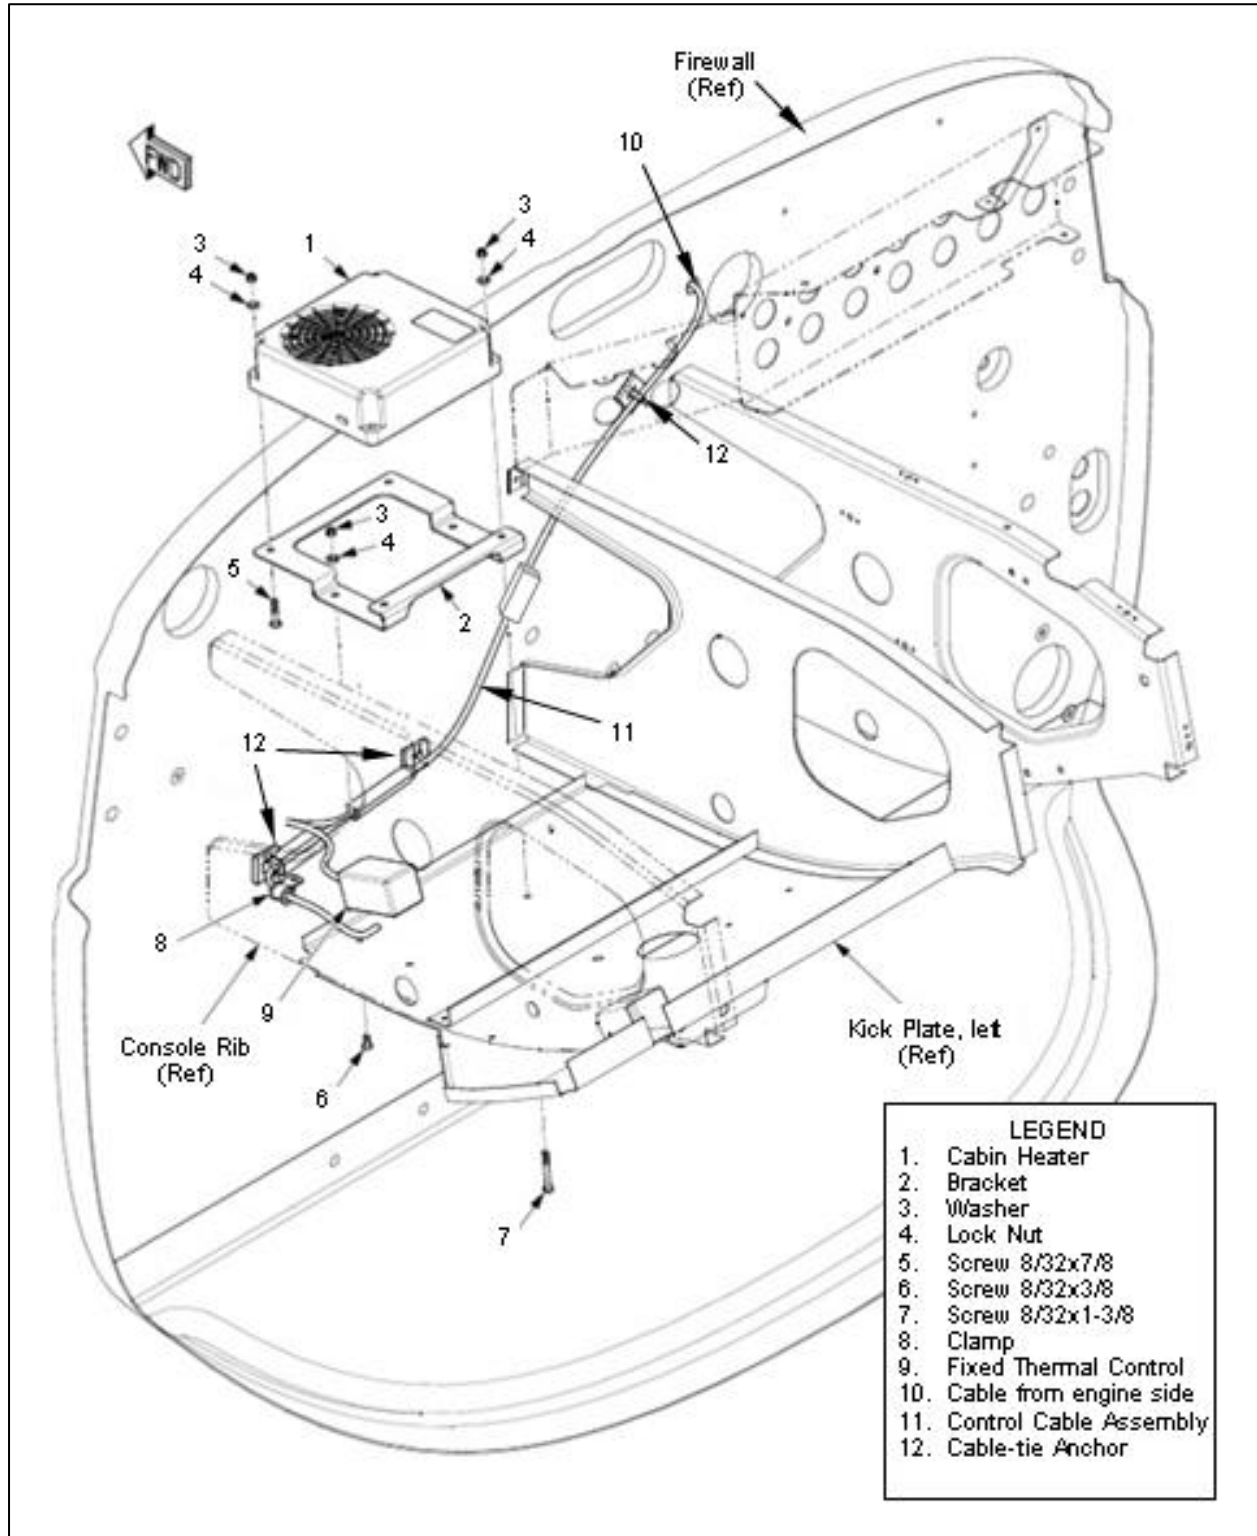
Heater kit parts explosion behind avionics panel. Cabling routed from engine mounted plug through firewall. Note: Firewall passthrough location may differ from location shown, refer to Figure 6.8.
